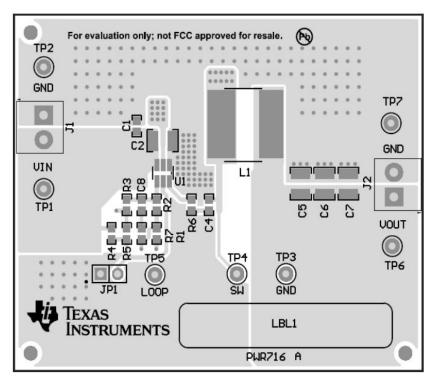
TPS54202HEVM-716 Top-Side Assembly
